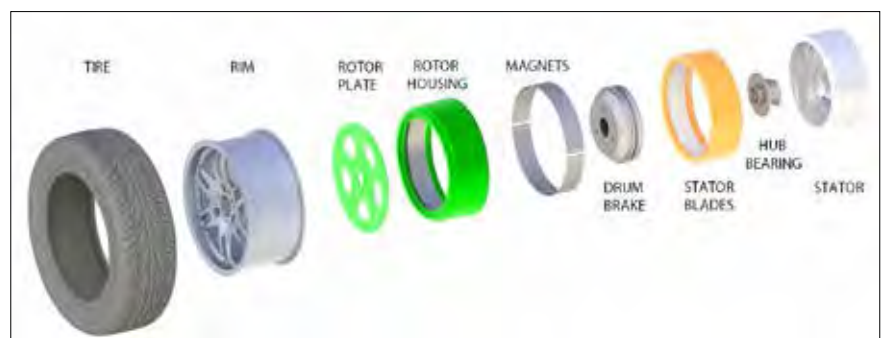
An exploded view of the SMART 2nd Generation in-wheel electric motor assembly to the vehicle hub bearing.
